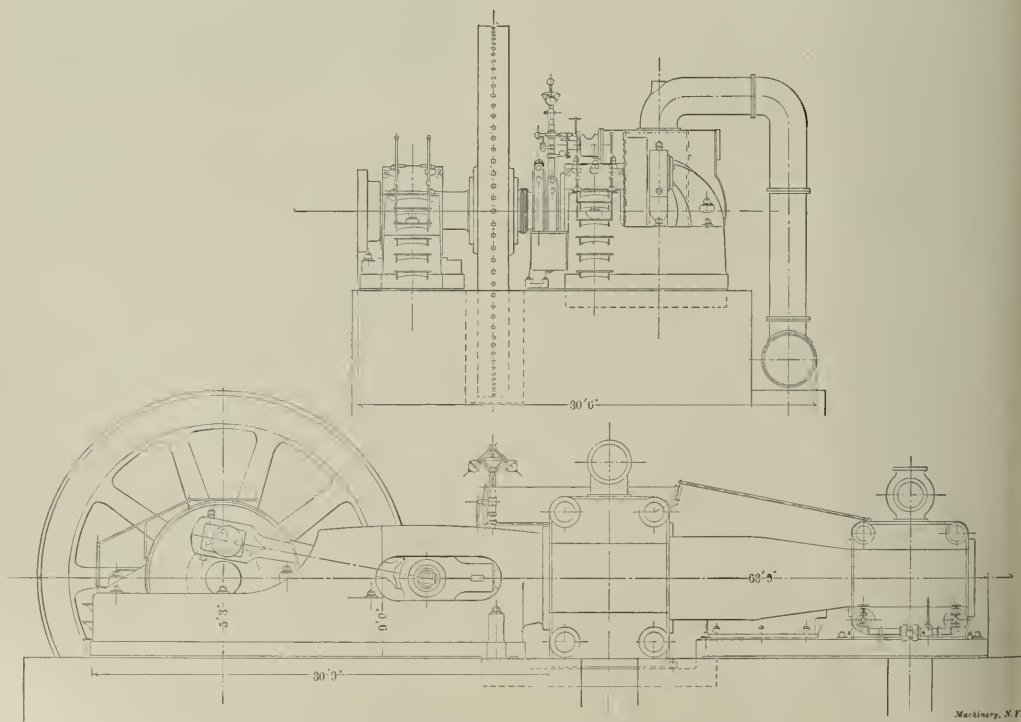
Side and End Elevations of Large Rolling Mill Engine. Cast Steel Flywheel, Weight, 224,000 Pounds.
